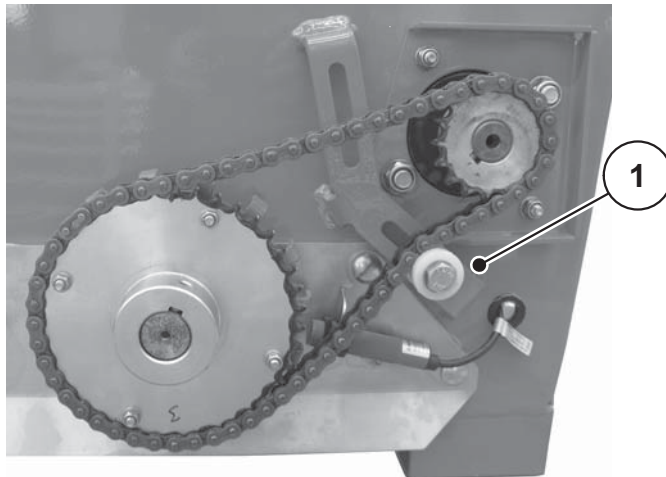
Chain idler assembly (clockwise PTO drive)
